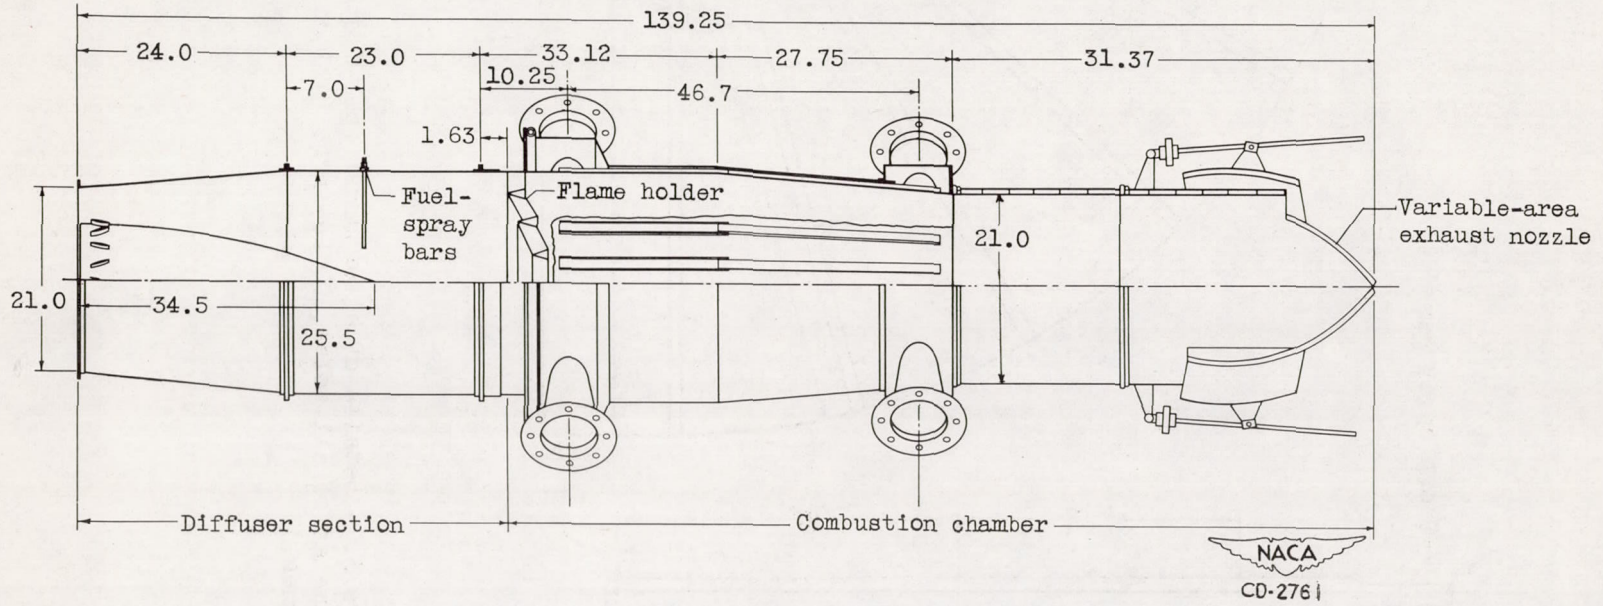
Sectional view of afterburner. (All dimensions are in inches.)
